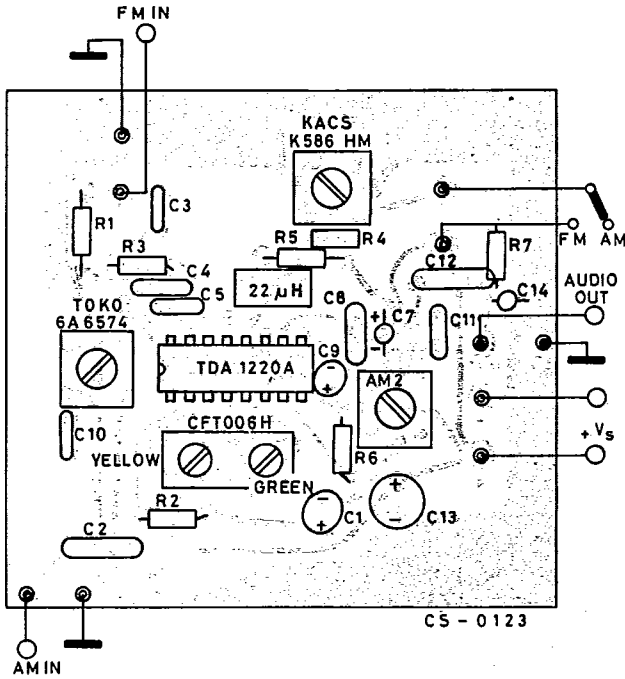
PC board and component layout (1 : 1 scale) of the test circuit
